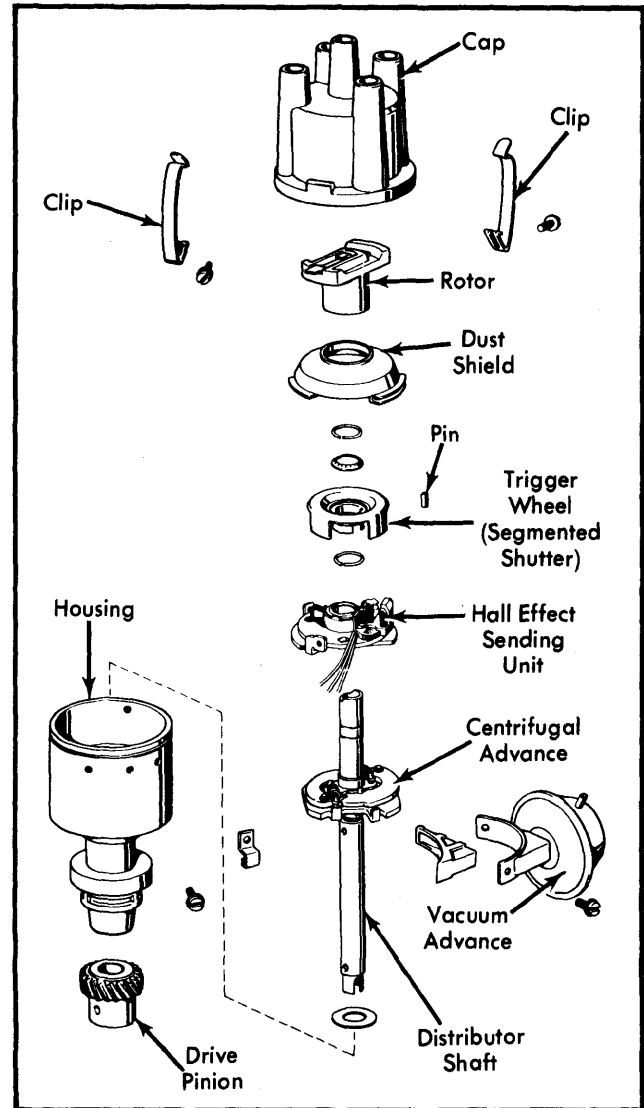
Disassembled View of Bosch Hall Effect Distributor
